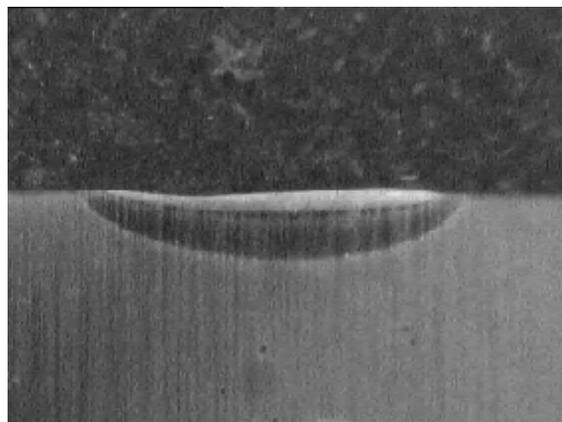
Shape of cross-section of the laser remelted samples of 32CrMoV12-28 with laser power 2.0 kW, mag. 200x
